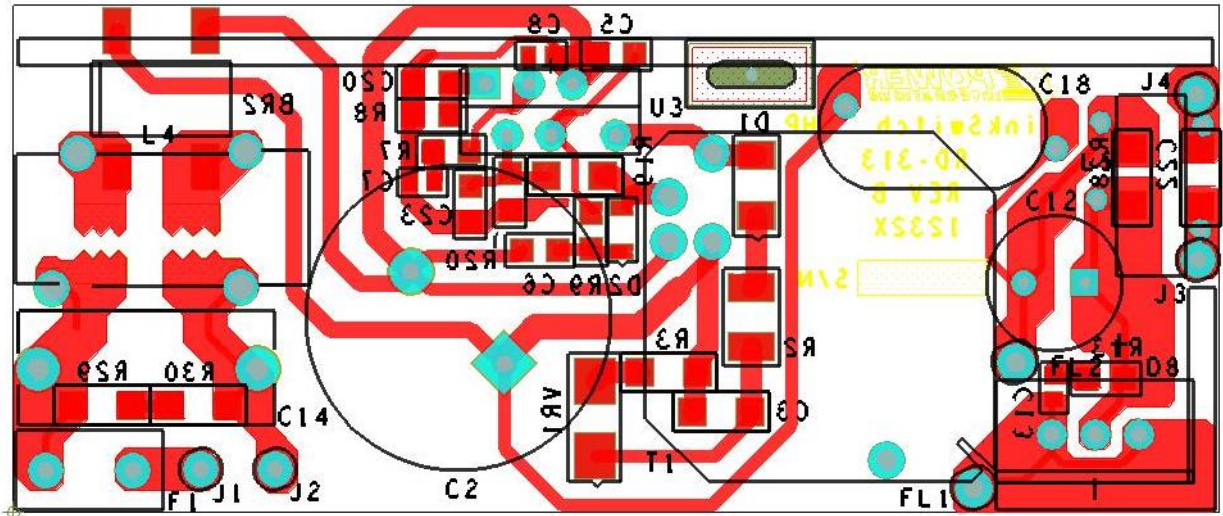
PCB Top/Bottom Side 2.76" (70.1 mm) x 1.16" (29.4 mm).
